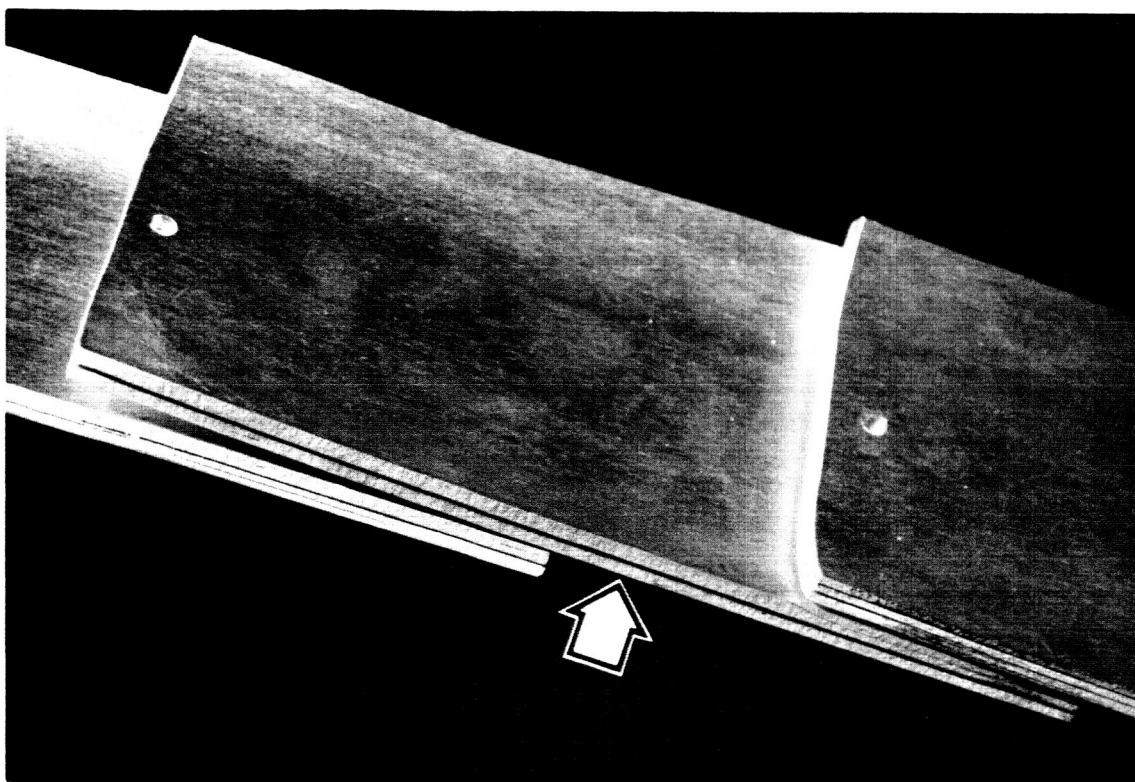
Figure III Edge Rolled Specimen - Sheared Edge Showing Material Separation
